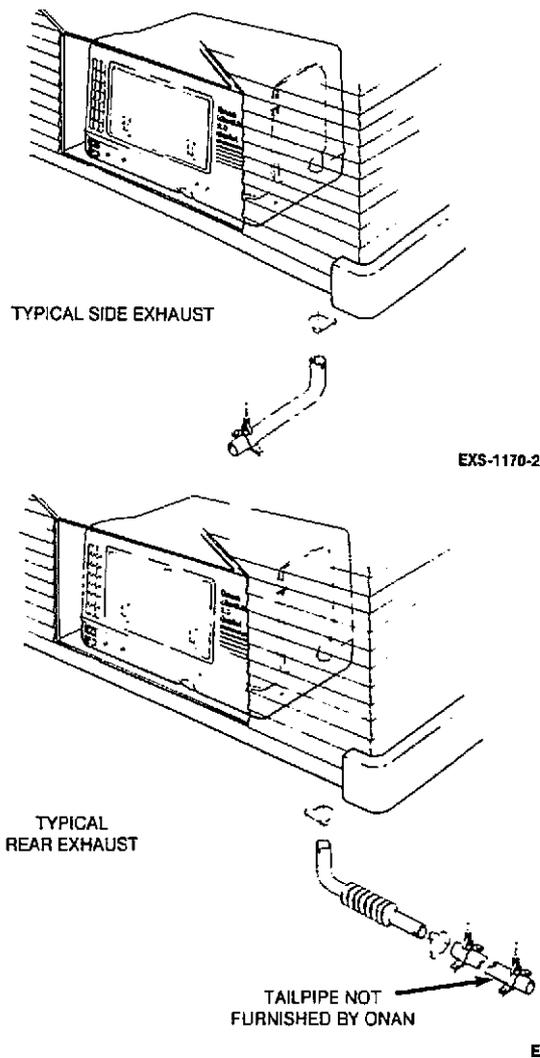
COMPARTMENT MOUNT EXHAUST SYSTEM
